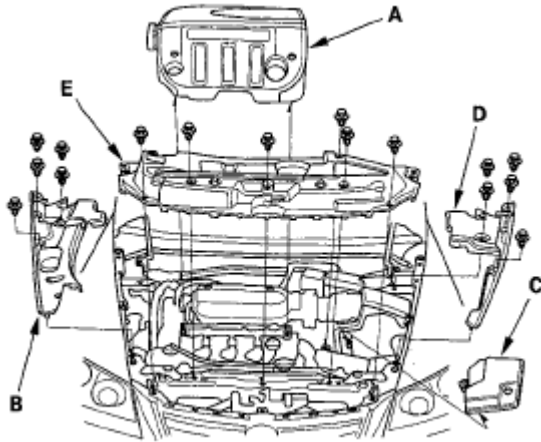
Identifying Engine Cover, Right/Left Upper Fender Trim, Battery Trim And Grille Cover
